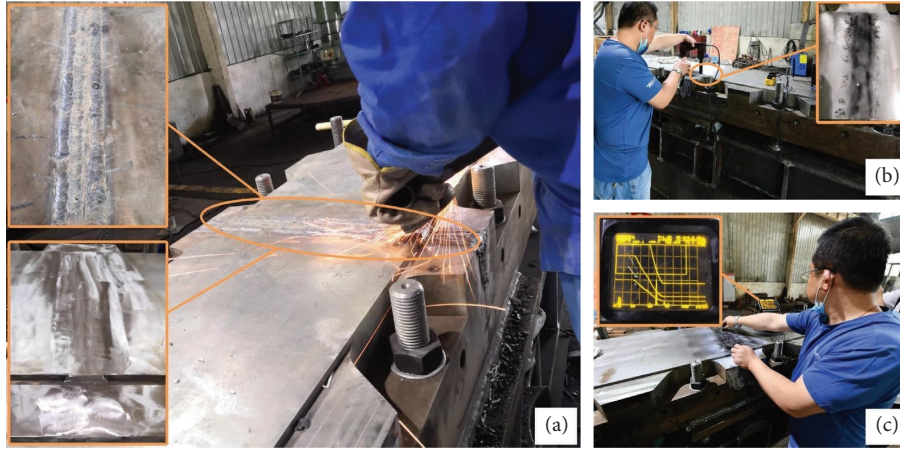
Weld inspection of the antenna's azimuth track. (a) Grinding of the track. (b) Magnetic particle testing of the weld. (c) Ultrasonic testing of the weld.
